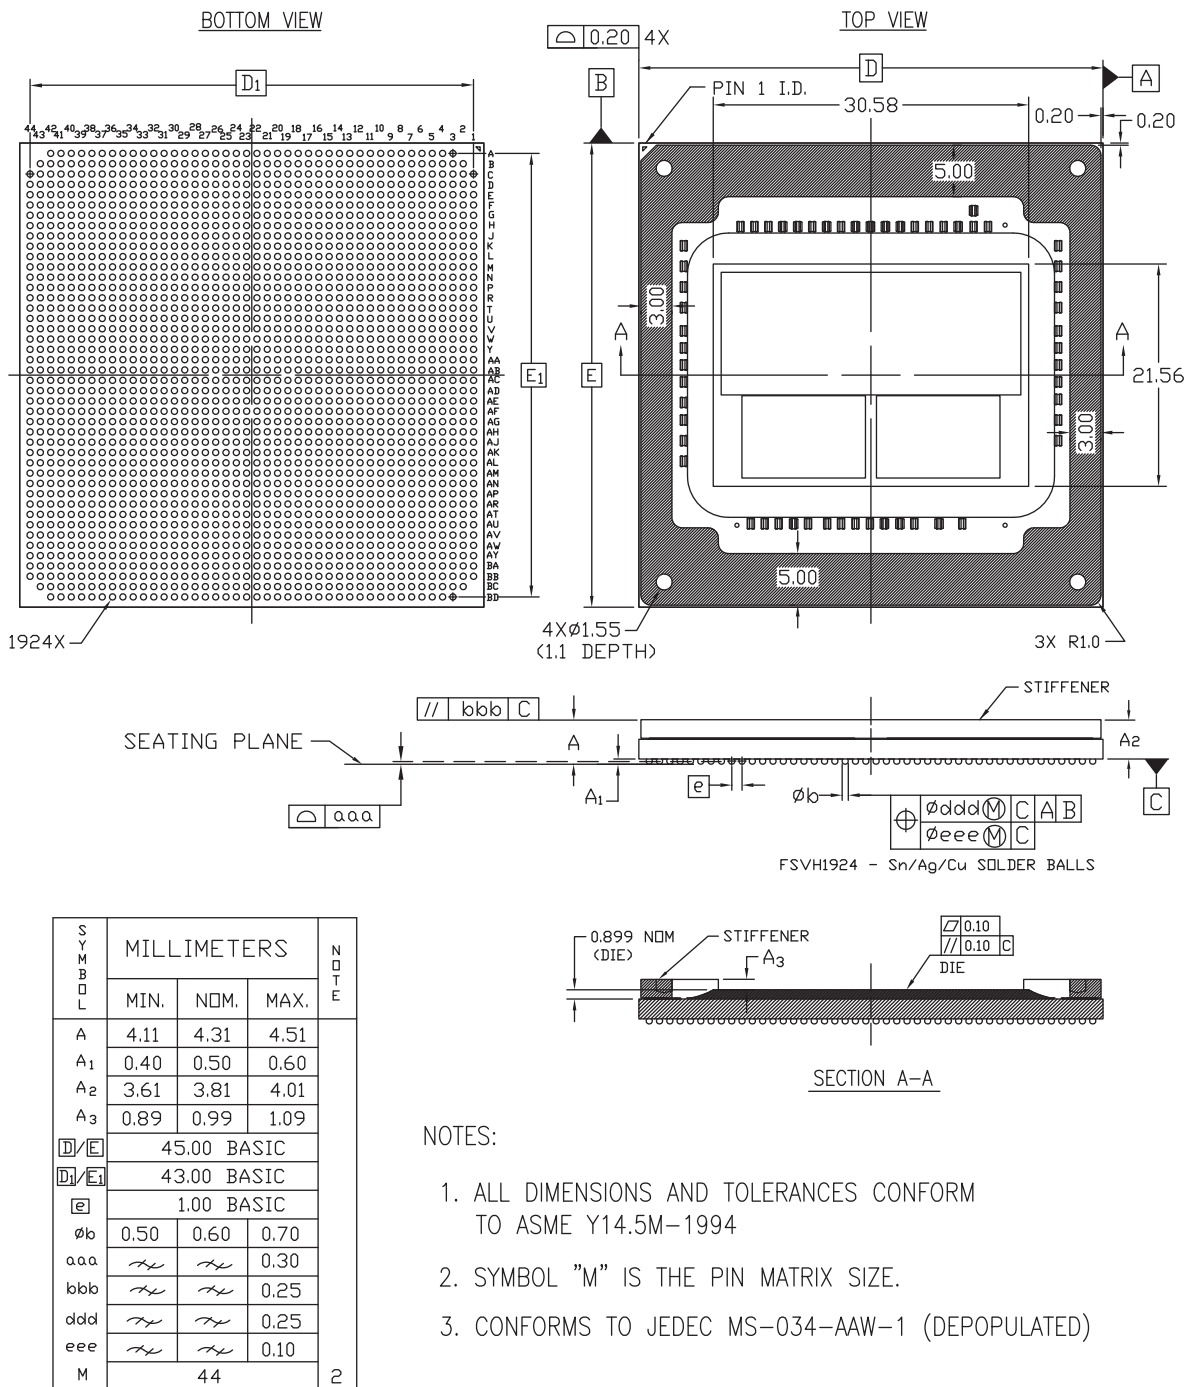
Package Dimensions for FSVH1924 (XCVU31P)
